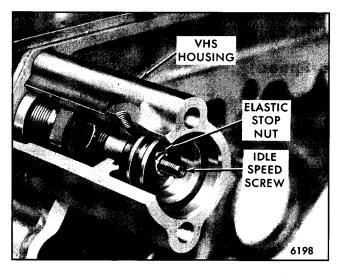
Adjust Elastic Stop Nut using Tool J 28598-A
